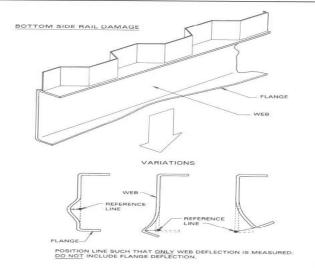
/Measuring damage to bottom rail web. See Section 4.2.5.
